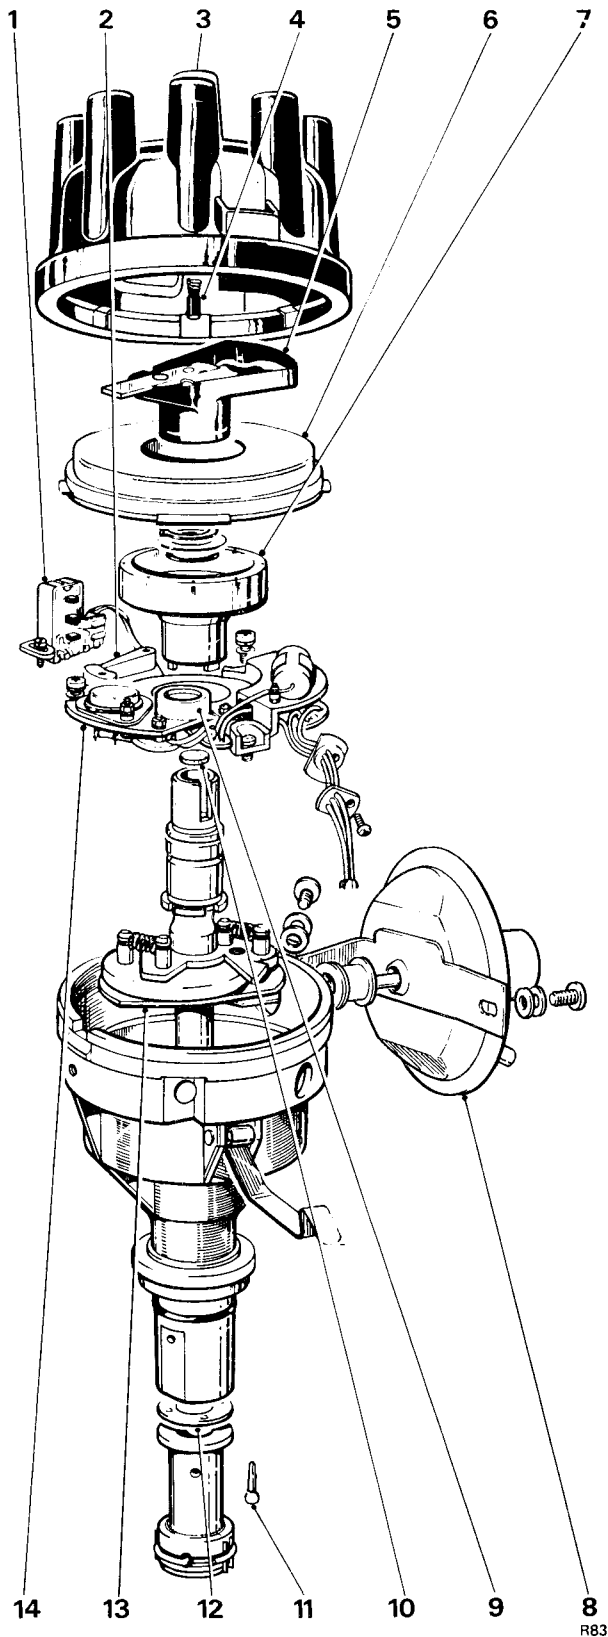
EXPLODED VIEW OF DISTRIBUTOR
